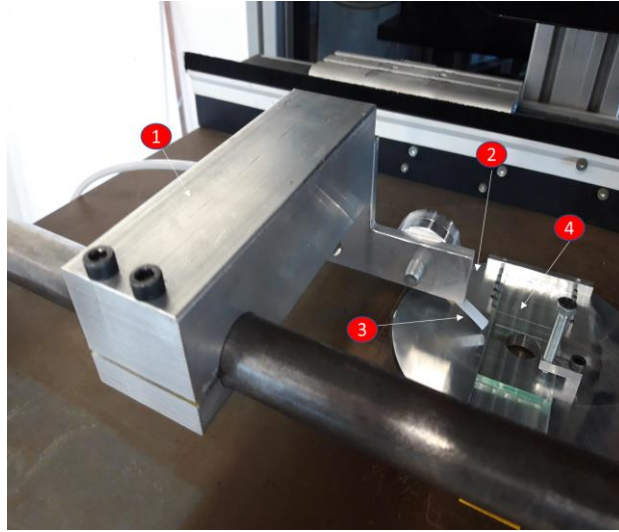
Equipment realized for the experiments: 1) equipment support; 2) reference system for sample materials; 3) air nozzle placed longitudinally to the machined channels; 4) glass sample.
